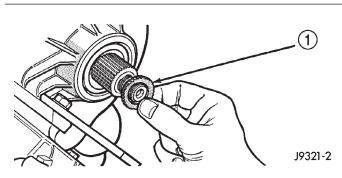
Flange Seal Washer Installation 1 – YOKE SEAL WASHER
